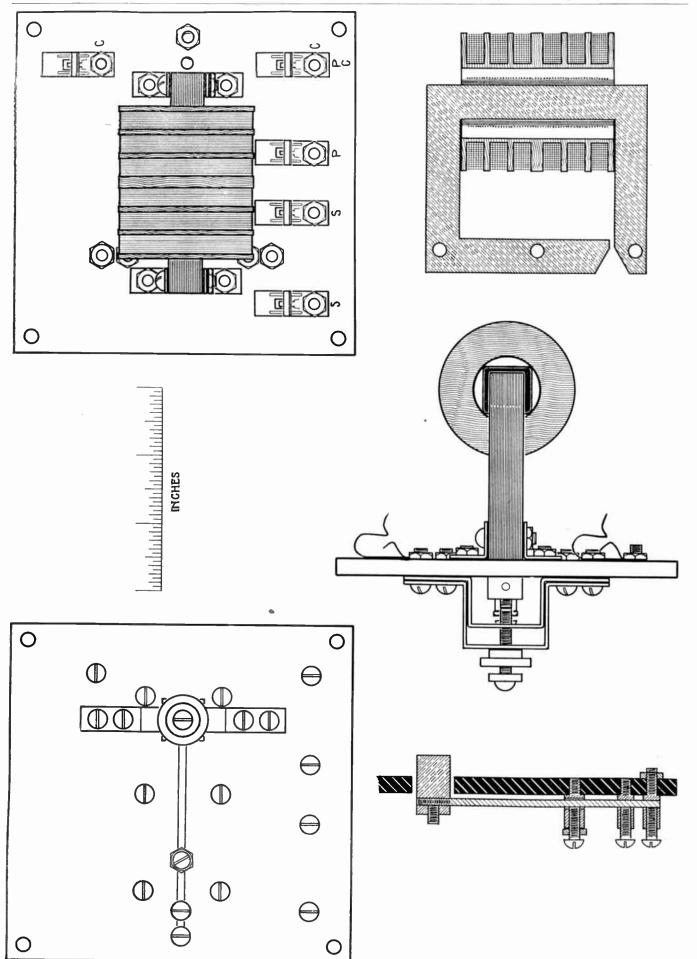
Front, rear, side, and sectional views of the transmitting buzzer
